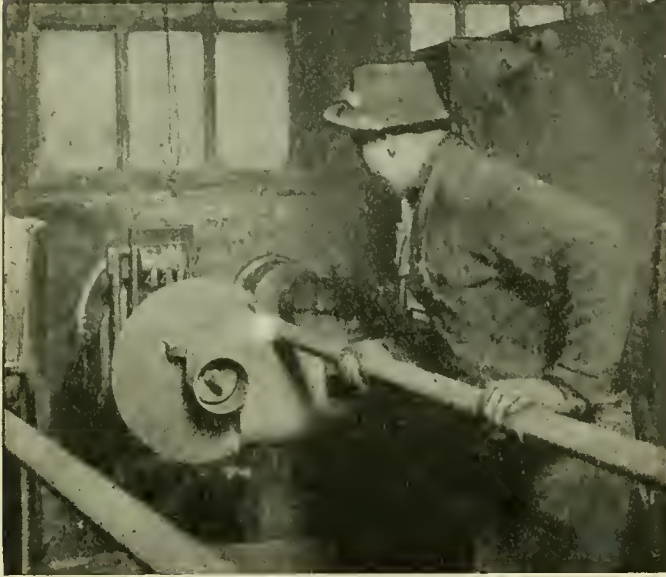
After Heating, the Fag Ends of Tubes Are Cut Off, Expanded and Safe Ends Inserted on This Machine
